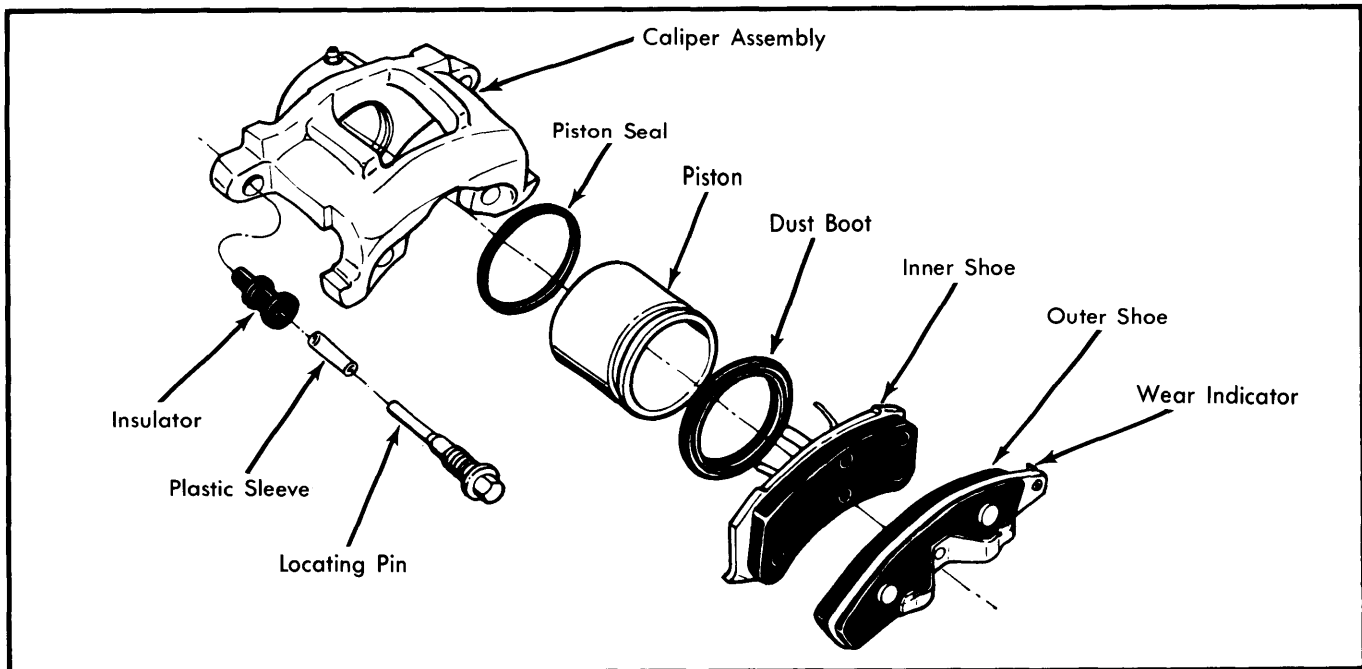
Exploded View of Front Pin Slider Caliper Assembly (Ford Motor Co. Only)
